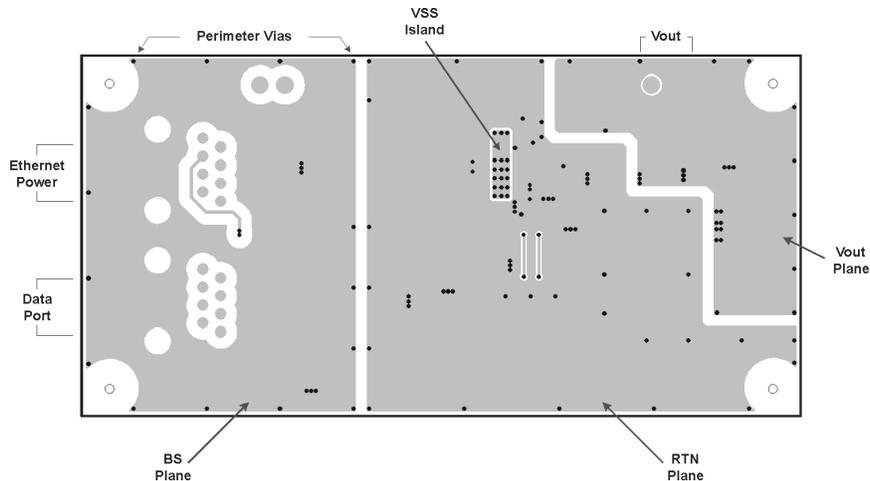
Bottom-Side Copper (Viewed Through Top)
